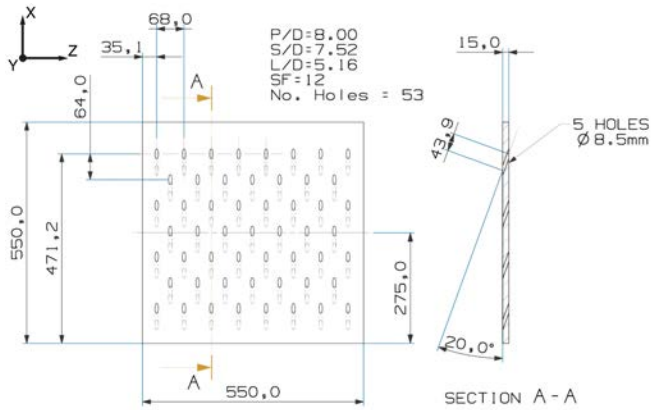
A drawing showing the effusion test-plate dimensions.
